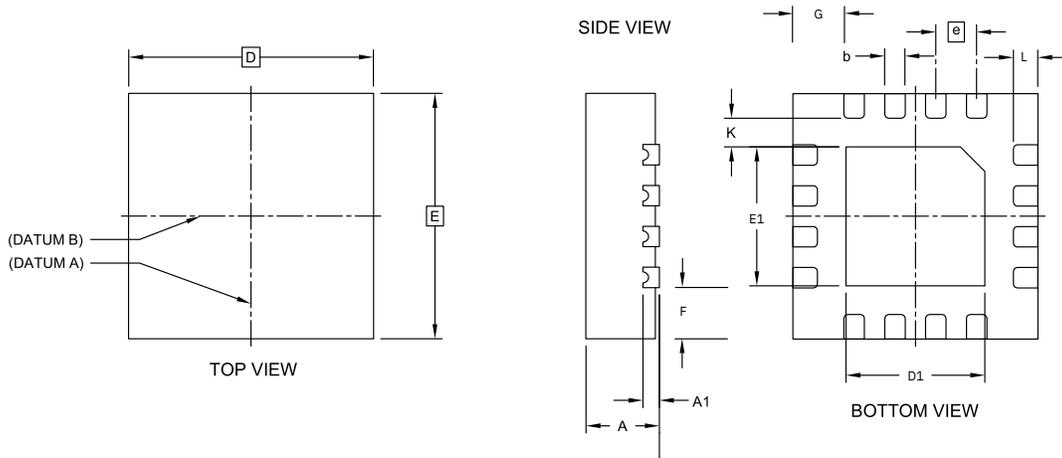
16-pin QFN 3.0 x 3.0 x 0.85 mm³ package drawing.
